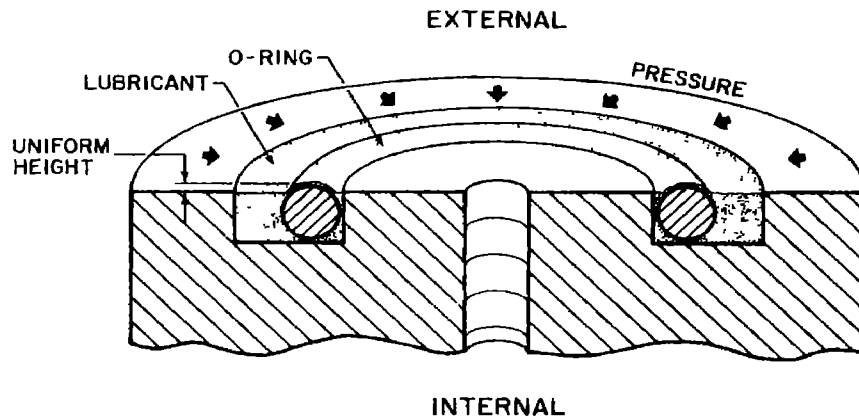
Properly grooved O-ring in face seal. In the diagram, the groove is filled to the top with a thick coat of lubricant (see Section 8.2.20.a); for a thin coat, only the groove walls would be coated (see Section 8.2.20.b). The O-ring is shown on the ID of the groove, as it would be if high pressure were on the external side during service; the O-ring will be in contact with the OD of the groove when high pressure is on the internal side during service.
